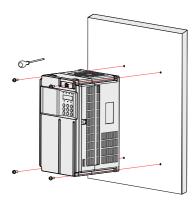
Backplate mounting of MD500ET0.4GB to MD500ET37G(B)
